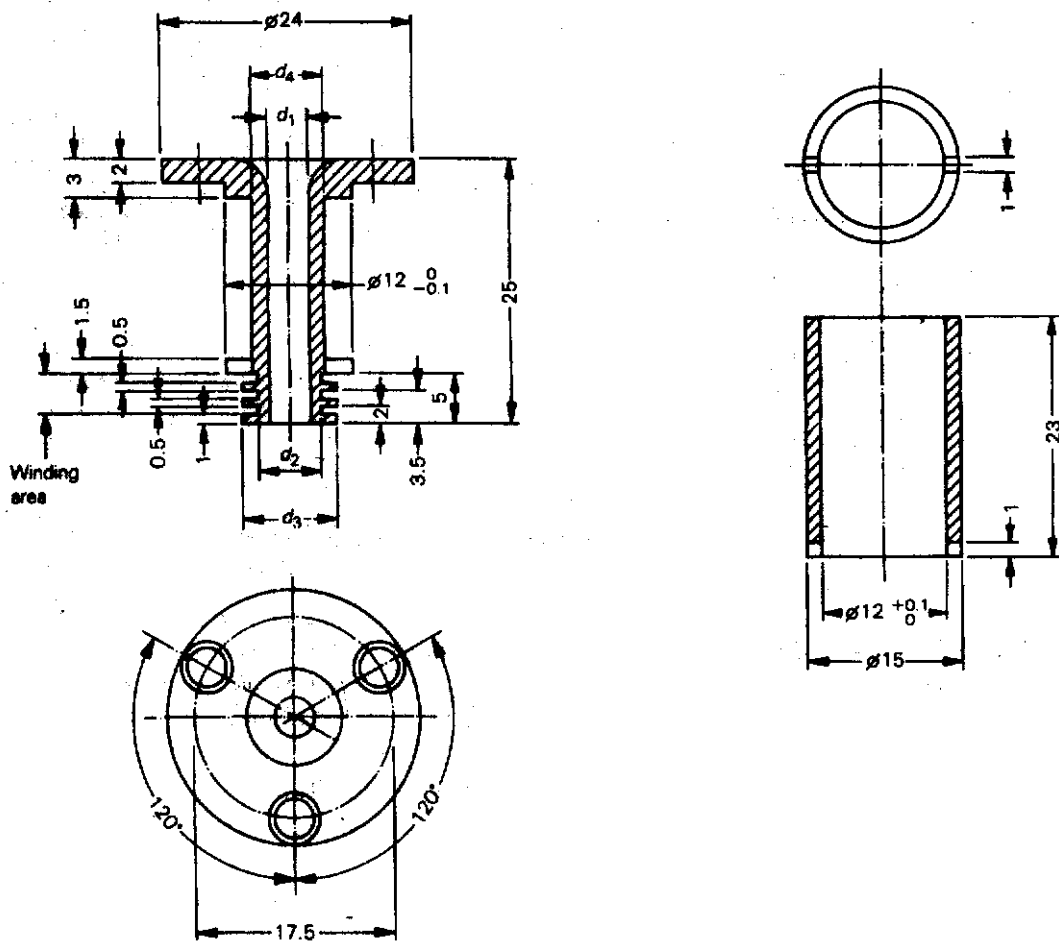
Coil former and protecting tube (dimensions in millimetres).
